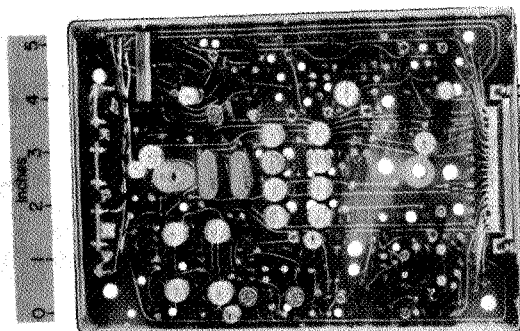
Printed circuit card, mounting component of medium density.
